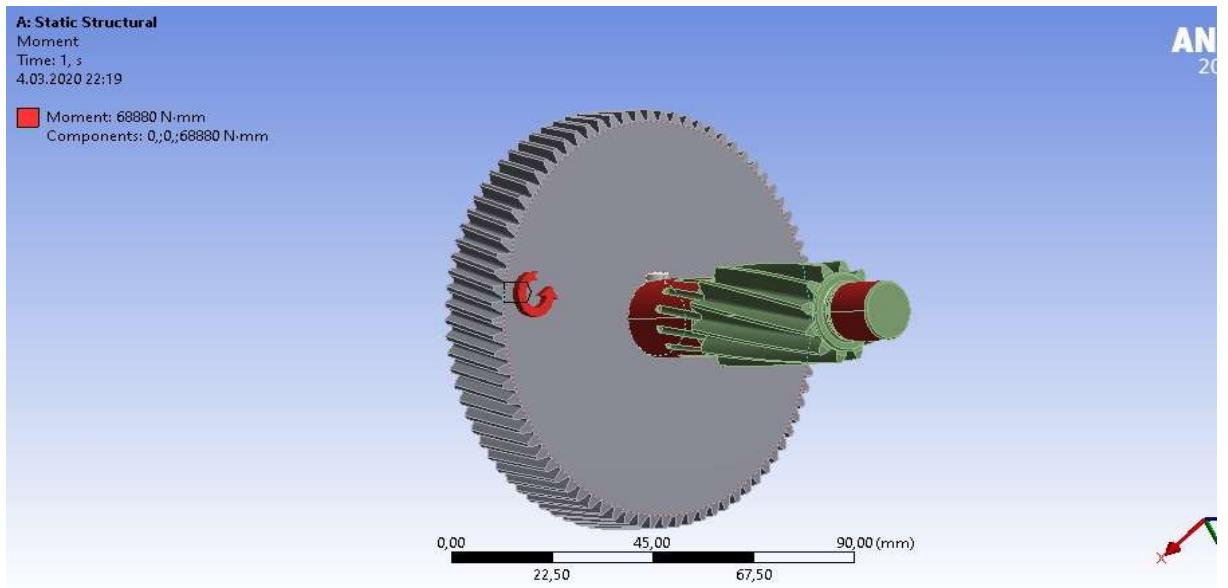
Z3-Z4 gears (z4 fixed)
